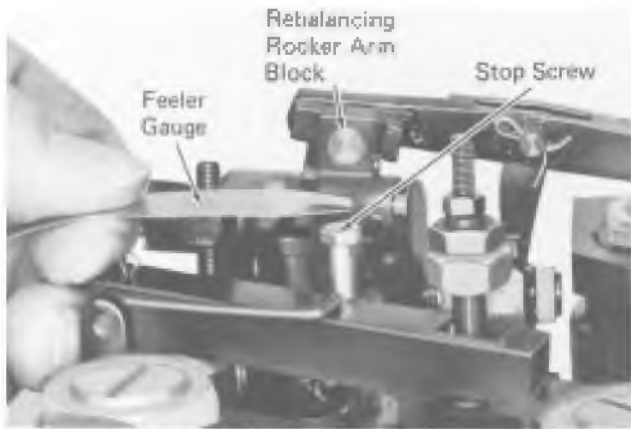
Rebalancing Stop Screw Adjustment
